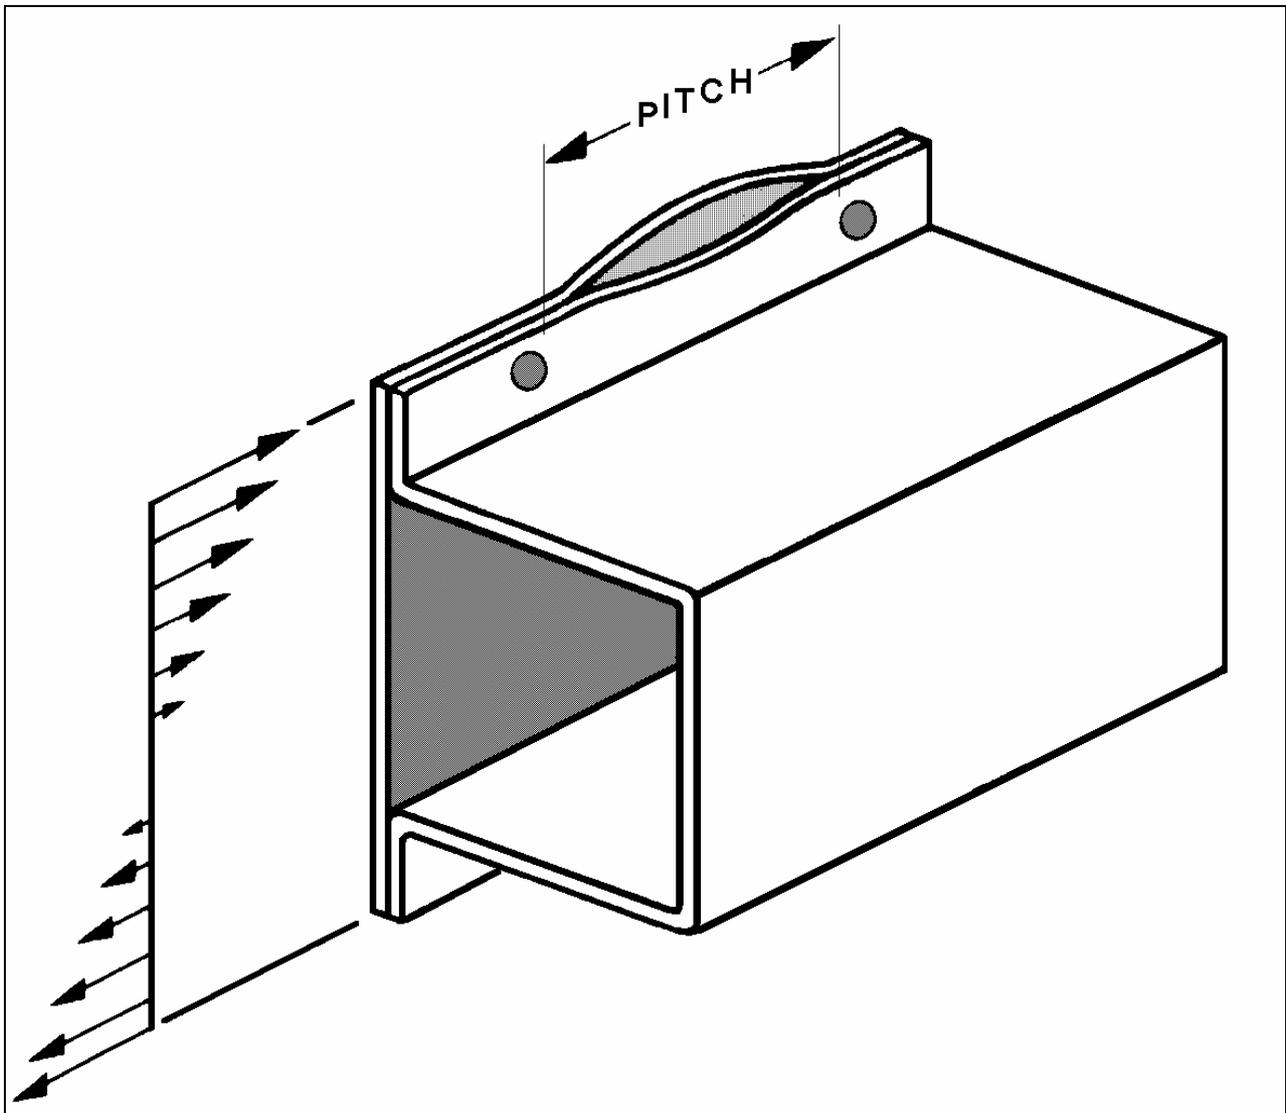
Flange gap in spot welded Hat sections with cover plate under bending
